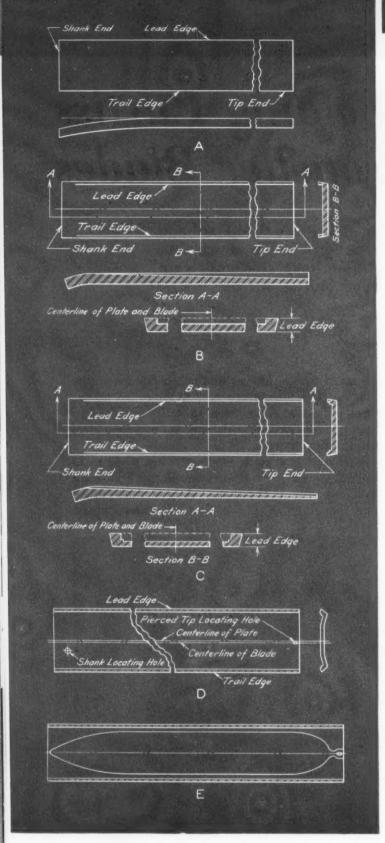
Initial Thrust-plate Forming and Machining Operations. (A) First Breakdown Gives Lateral Curvature; (B) First Milling Produces Tapered Contour; (C) Second Milling Forms Stepped Edge Contour; (D) Lengthwise Breakdown Prepares Plate for Final Milling; (E) Diagram Indicating Contour of Blank to be Cut from Thrust Plate
